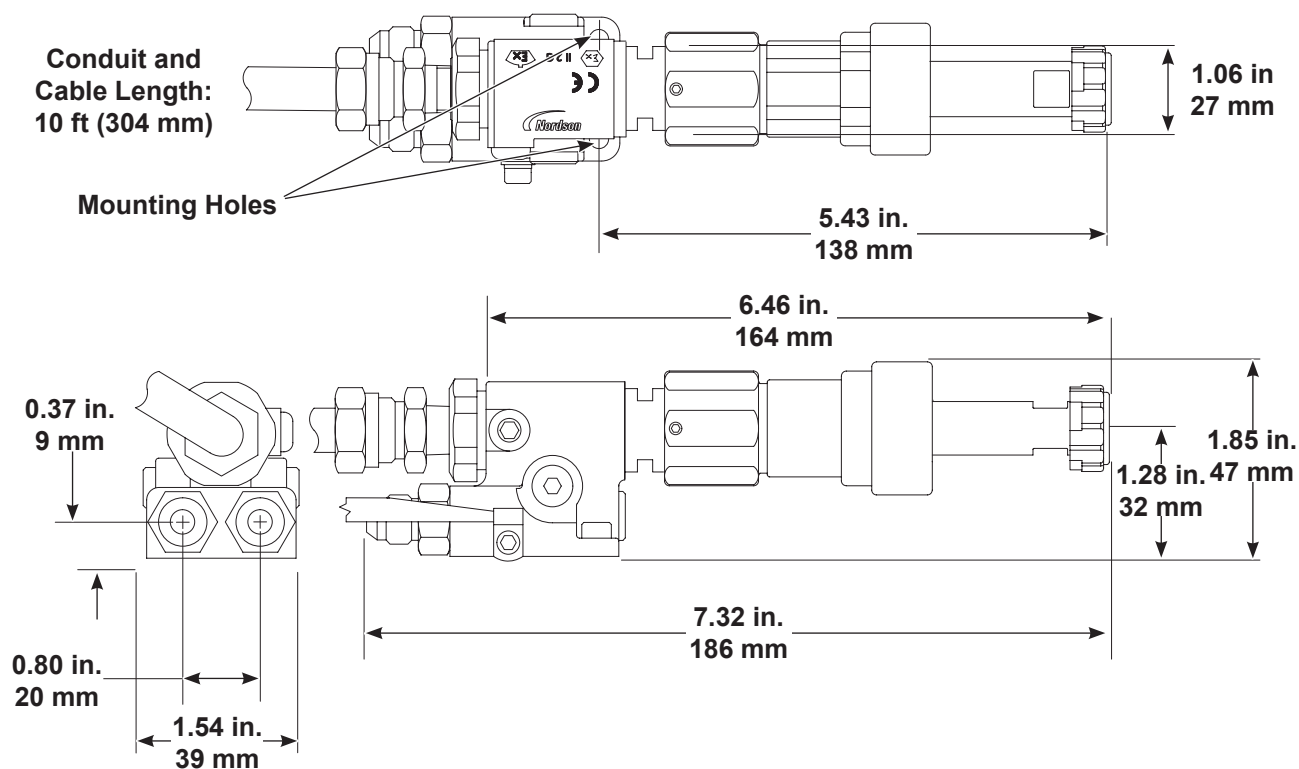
Gun Dimensions for Extended Tip Spray Gun
